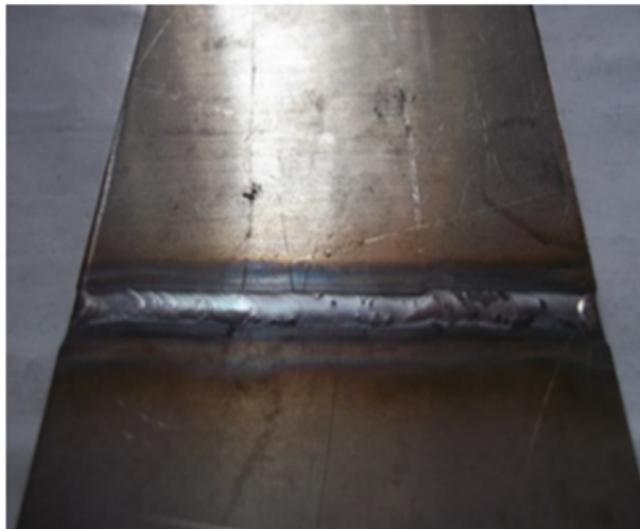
TIG welded duplex stainless steel sample
